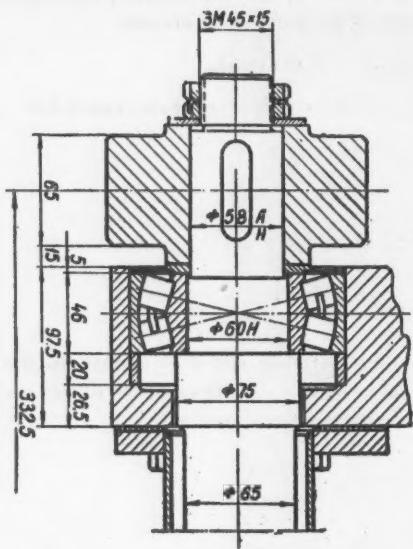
New positioning of bearings and rollers in the KhPT-32 mill.
